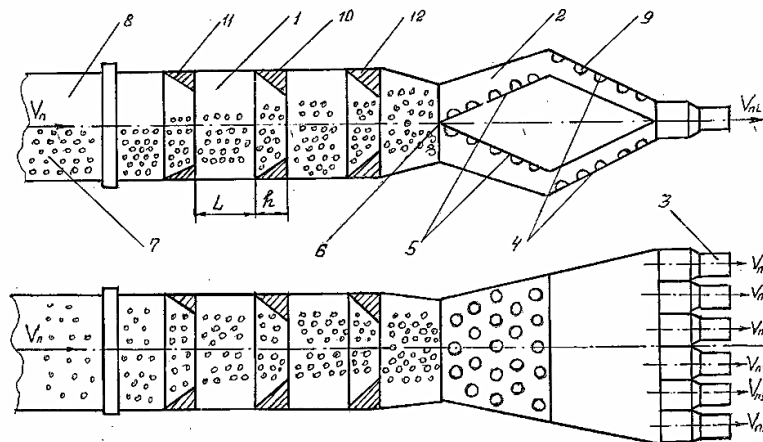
Scheme of a horizontal distributor of loose materials with turbulators to pneumatic or combined pneumo-mechanical sowing systems of wide-spread seeding machines.
